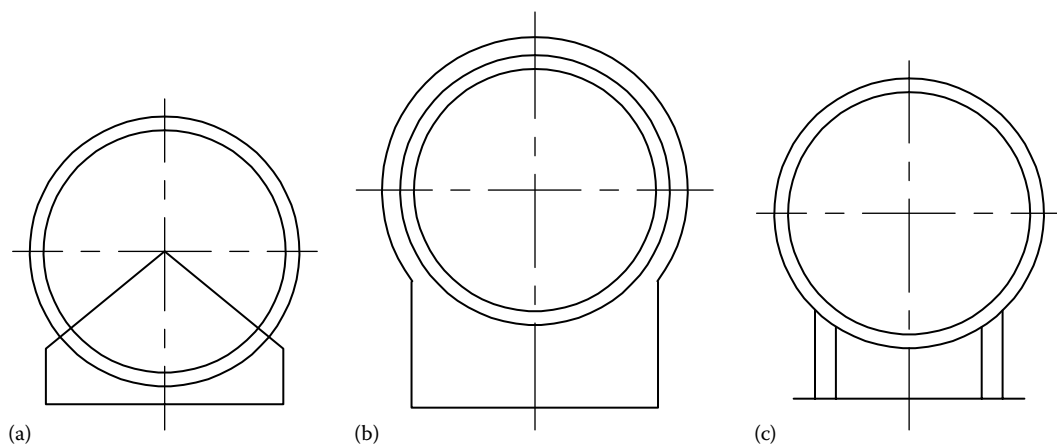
Examples of horizontal supports of pressure vessels, (a) Saddle support; (b) ring support; and (c) lug support.
